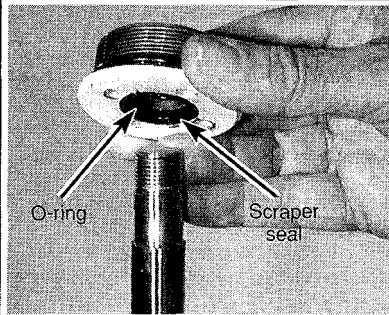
Slide the end cap down onto the tilt rod with the threaded end facing up...
